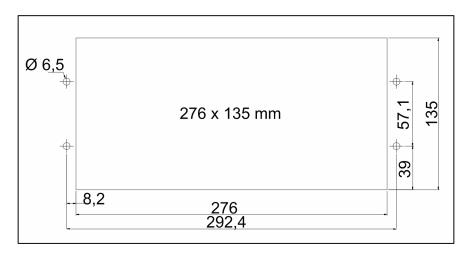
Dimensional diagram: LT2 panel assembly dimension
